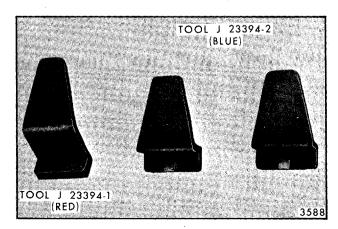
Glass Alignment Gage Blocks - Tool J-23394 or Equivalent (Set of Three Blocks) - F Styles
